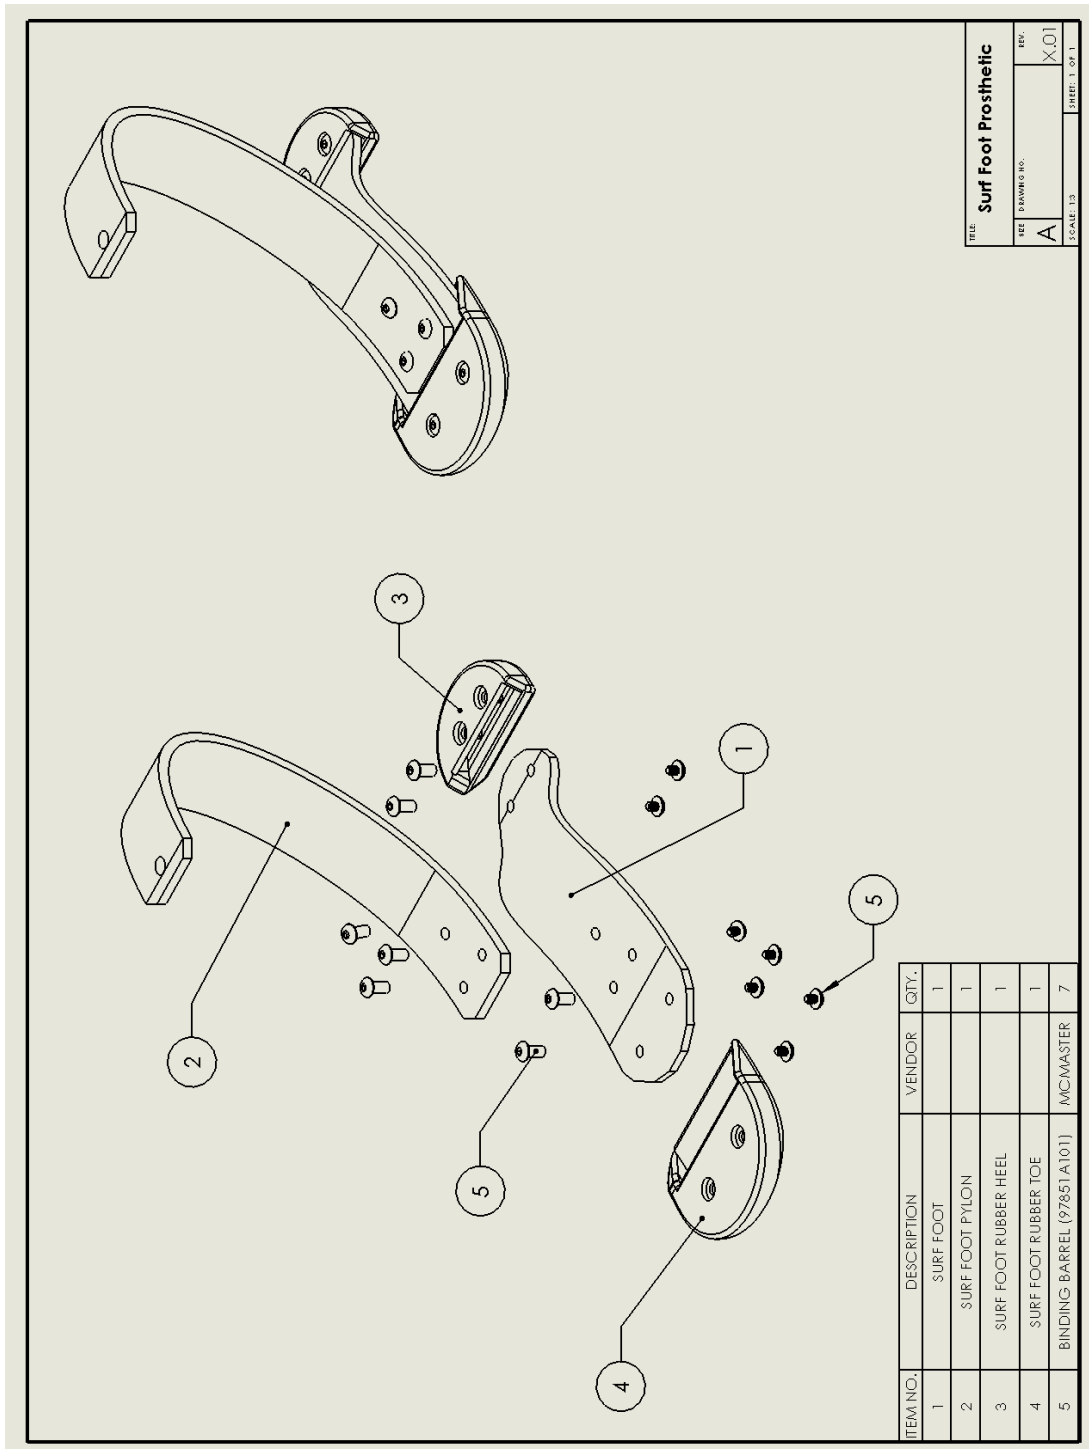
Detailed Drawing of Assembly with Bill of Materials
